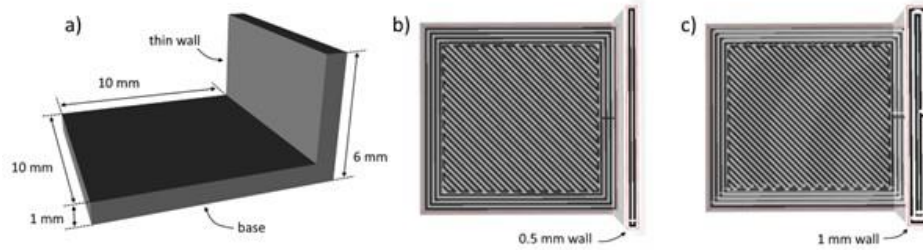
a) Thin walls used as substrate; b) scan path for 0.5 and c) 1 mm wall print
